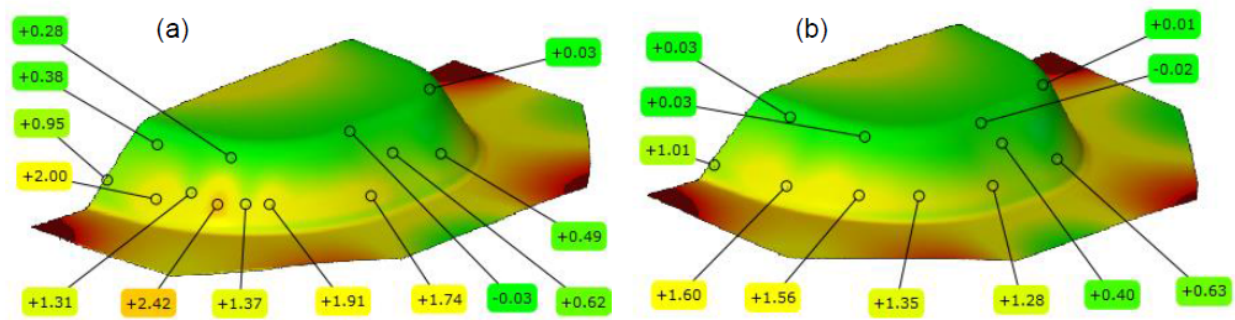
Comparison of occurring wrinkle height when using rigid blank holder; (a) part deep drawn at a blank holder force of 900 kN; (b) part deep drawn at a blank holder force of 1,050 kN
